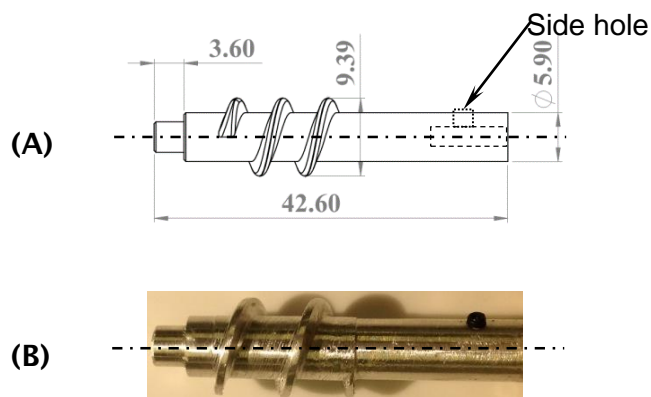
Fabrication of the aluminum screw shaft screw shaft. (A) Design of screw shat with pitch 7 mm. The key dimensions are highlighted. (B) Fabrication of the screw shaft.
